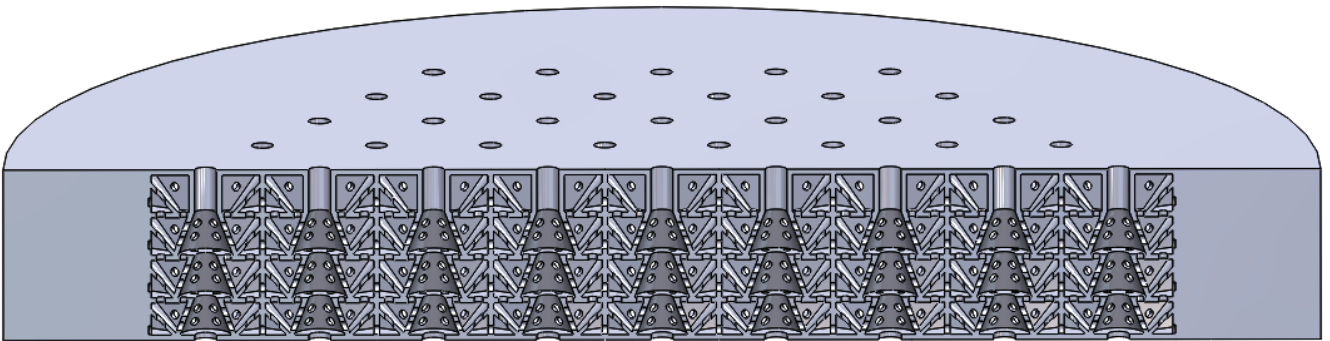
MIMO - Small Cavity AMM Panel - CAD - Vertical Cross-Section View
